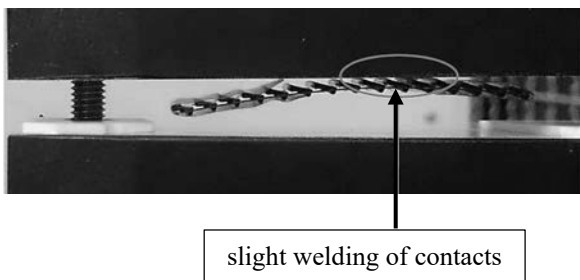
Example of a slightly welded contact which adheres to the upper conductor. In this investigation, the contact element can easily be separated manually.
